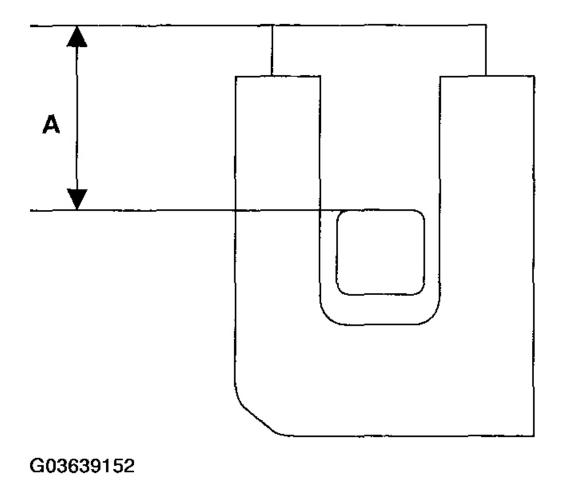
Measuring Brush Length Courtesy of AMERICAN HONDA MOTOR CO., INC.
